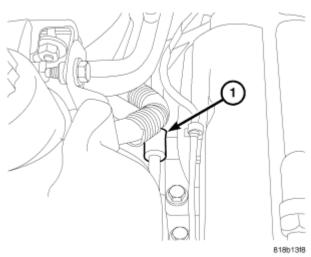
POWER STEERING LINE SUPPORT Courtesy of CHRYSLER LLC
